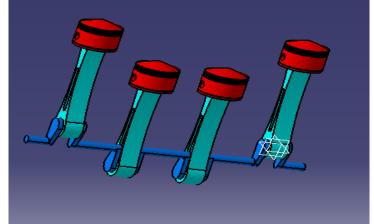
assembly drawing of piston, connecting rod and crankshaft
